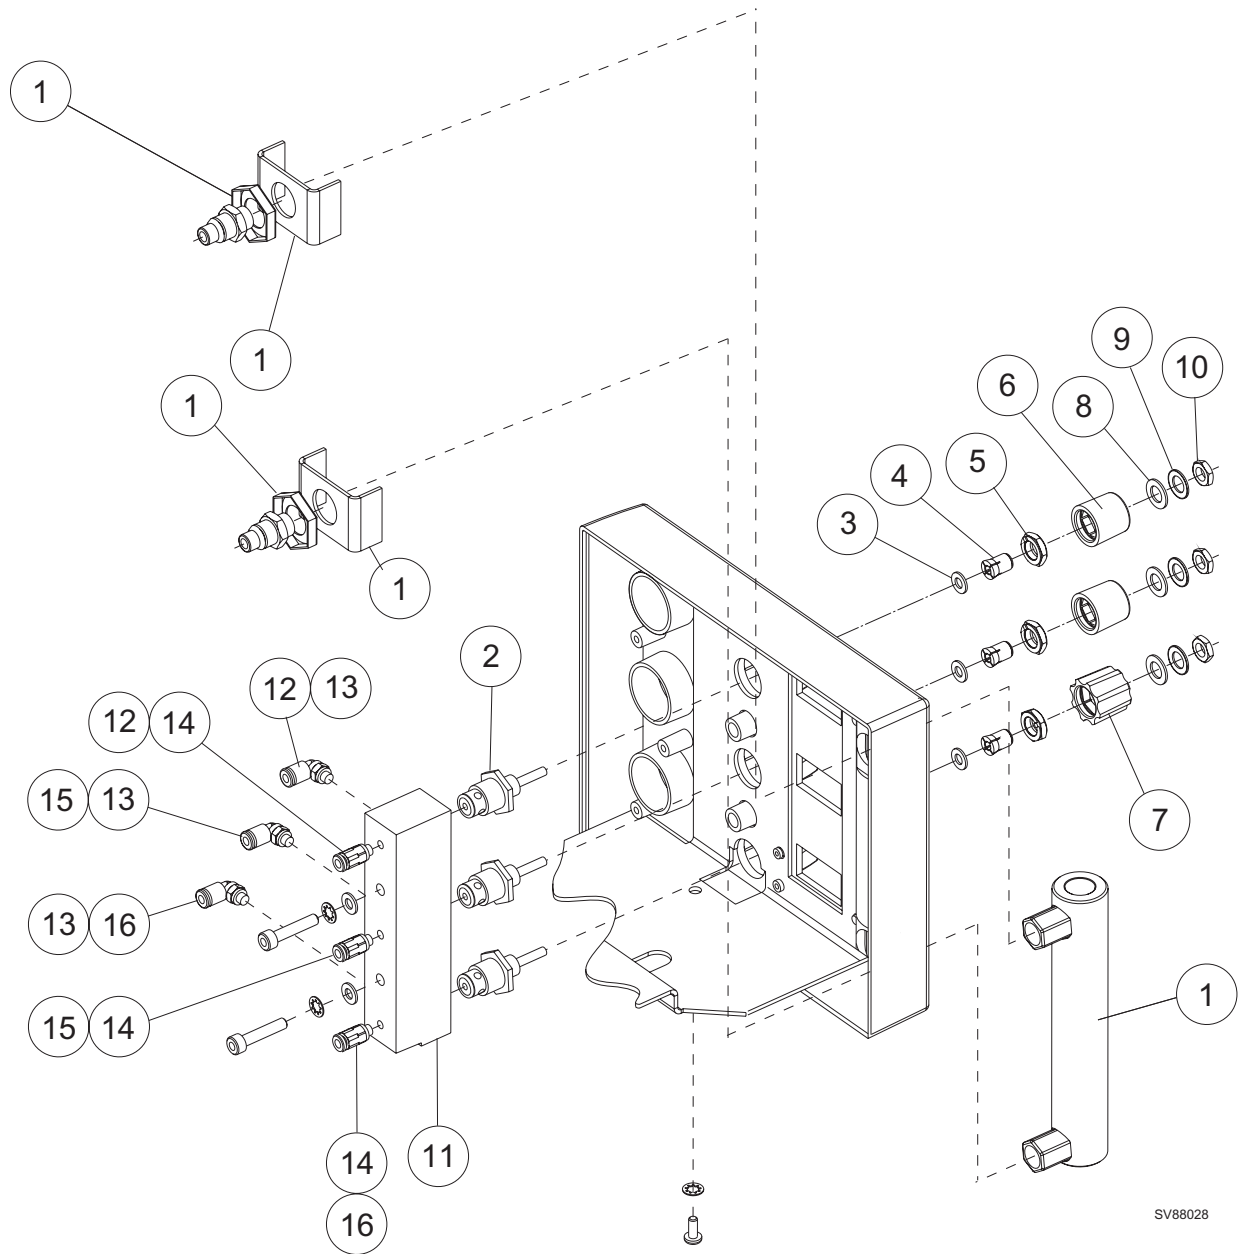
Flowmeter Tube Assembly, Flow Control Valves, and Valve Manifold (part of Flowmeter Bezel Assembly 4118287 or 4118288)
